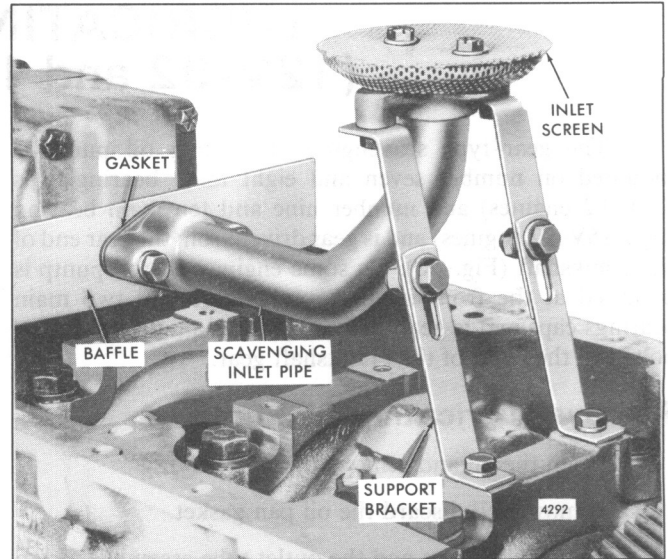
Scavenging Inlet Pipe and Screen Mounting
